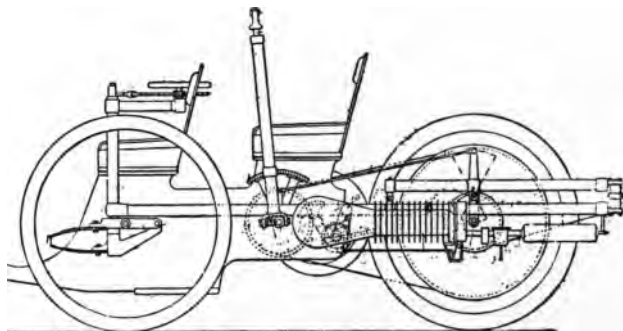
Bollée Road Motor Car (Side Elevation).
